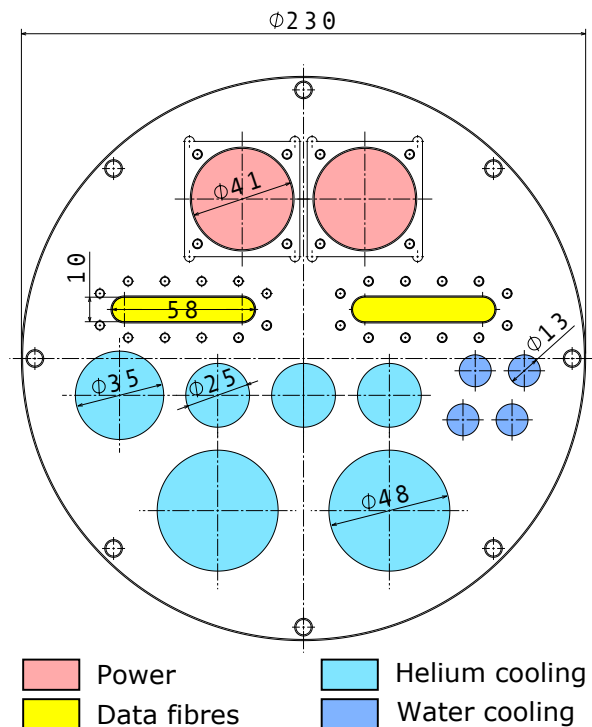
Drawing of the cabling flange. Additional ports will be added for auxiliary use. Dimensions in mm.
